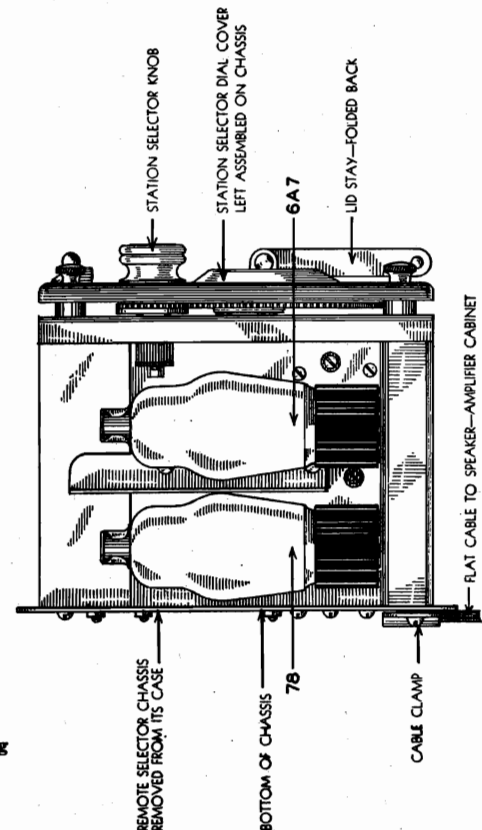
Chassis of Remote Selector removed from its case for Tube Replacement.
